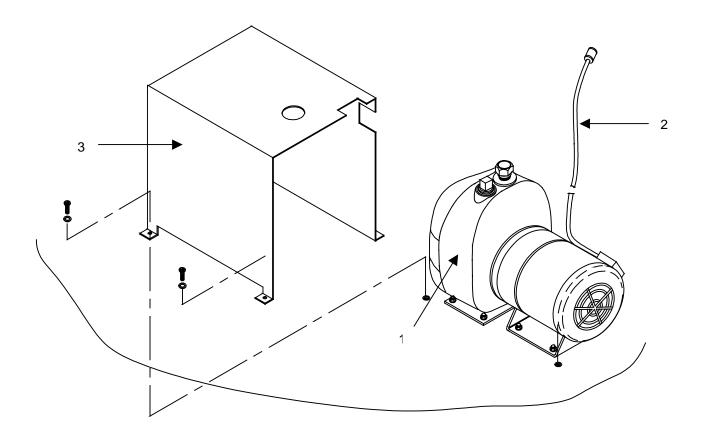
Group 0301 Freshwater Pump 0053 00-(1 Blank)/2
